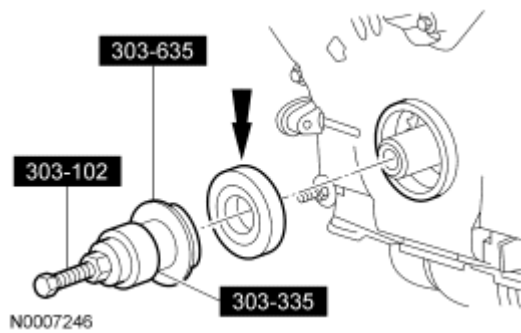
Installing Crankshaft Front Seal Using Special Tools (303-102, 303-335, 303-635)
